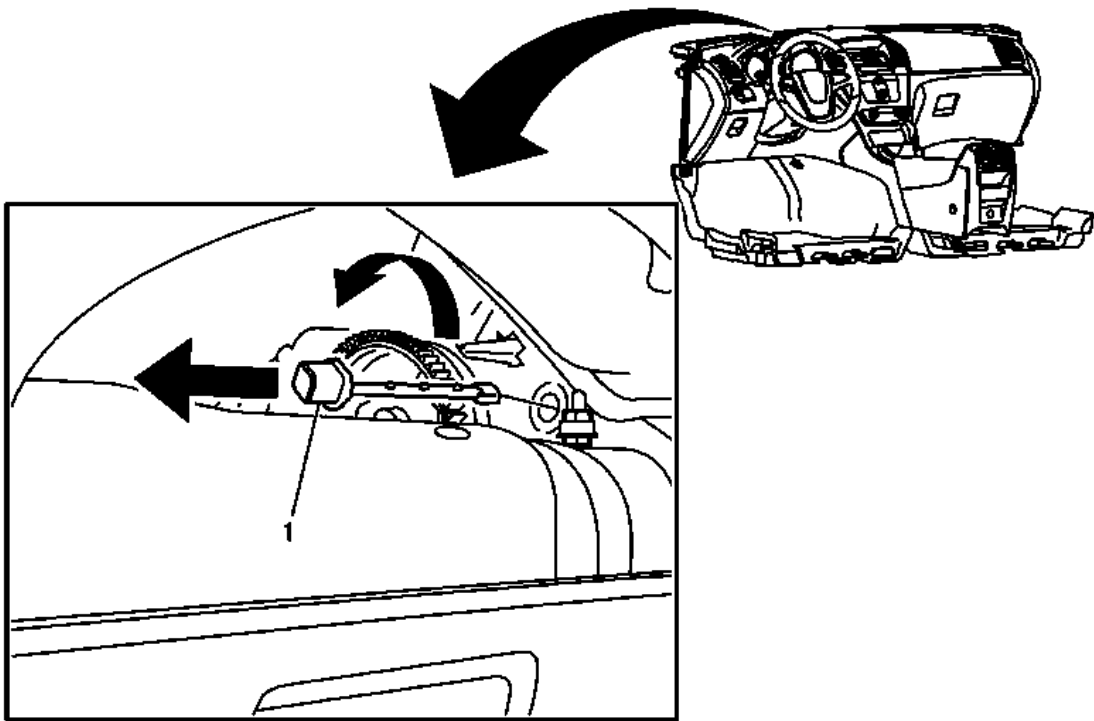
Duct Air Temperature Sensor - Upper Left Side (Left Hand Drive)
